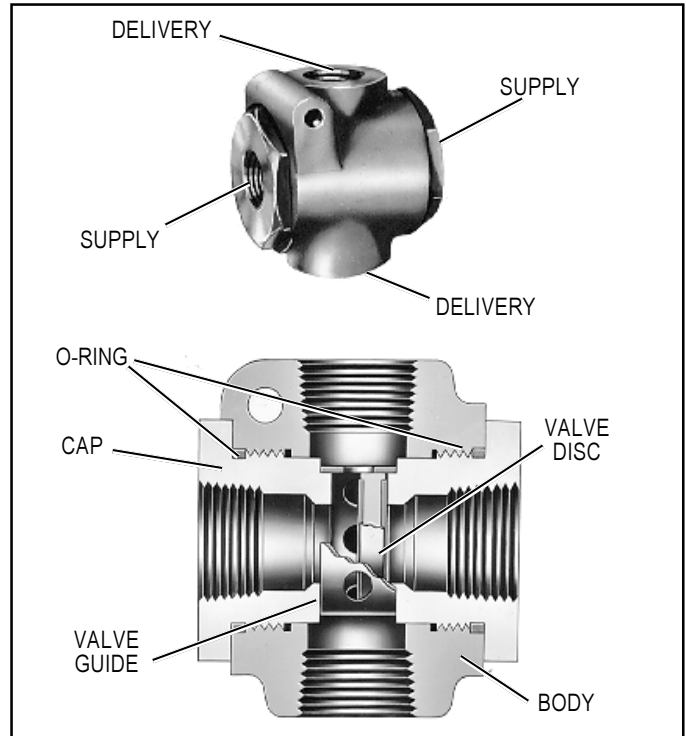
DOUBLE CHECK VALVE (DISC TYPE)
